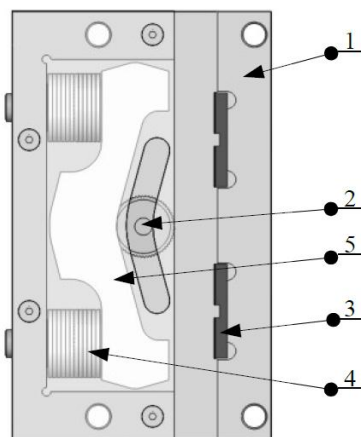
Diagram of CHP2000 type progressive gears: 1 – a body, 2 – a braking roller, 3 – a braking plate, 4 – Belleville springs, 5 – a cam [5]
